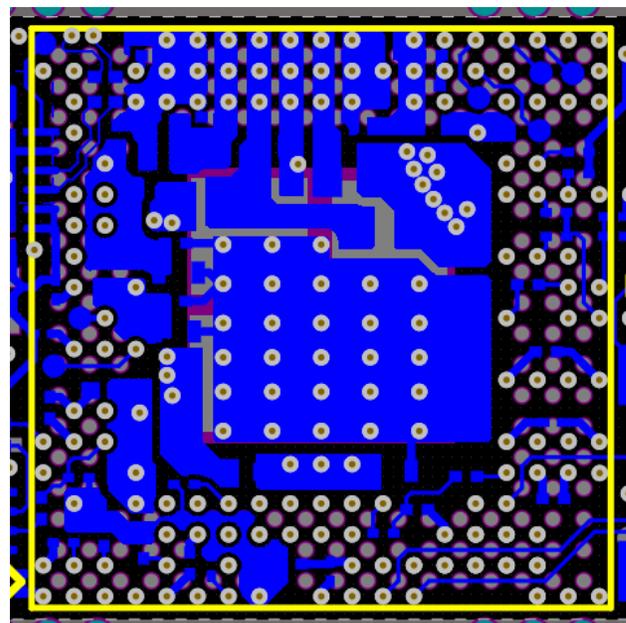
Via Placement Under the BGA Bottom Side Layout Image
